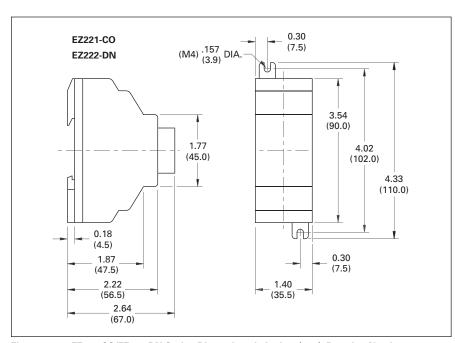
EZ221-CO/EZ222-DN Series Dimensions in Inches (mm), Drawing Number MD05013010E
